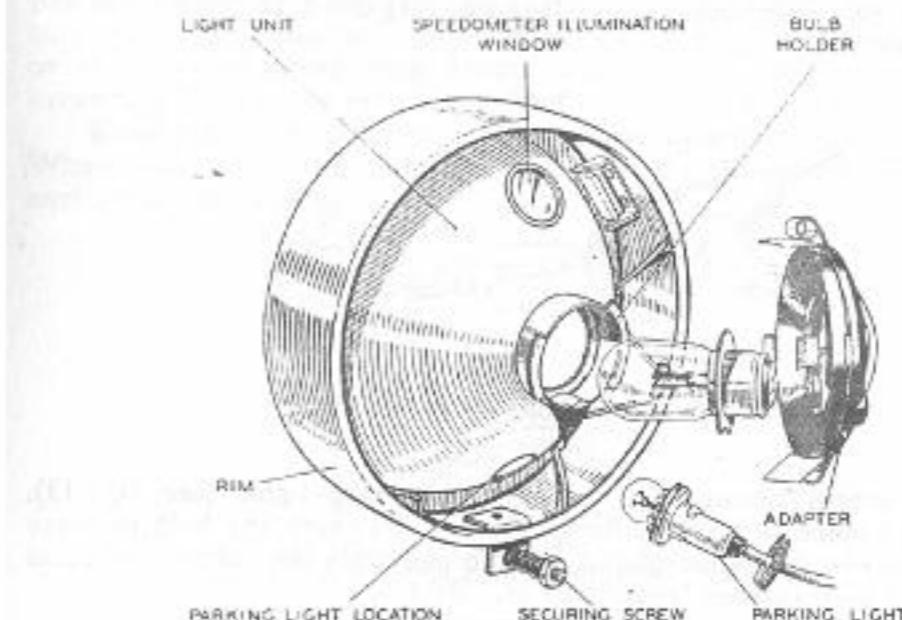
Model F575P Light Unit and Rim removed from Lamp Body.
